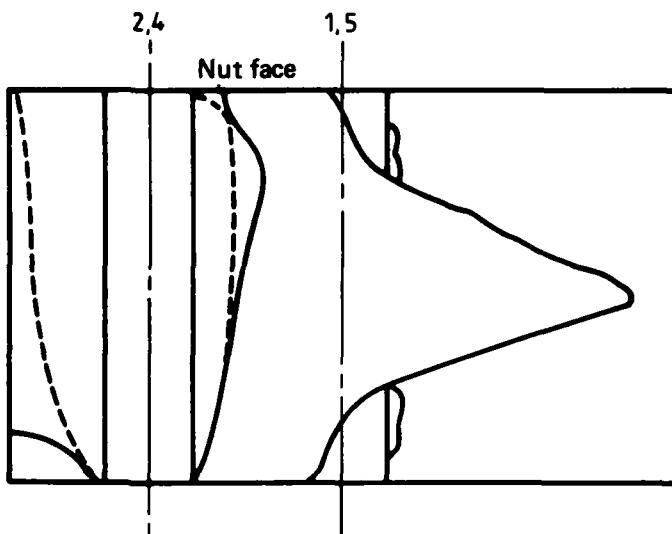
(c) FRACTURE SURFACES: SPECIMEN TYPE (C)
